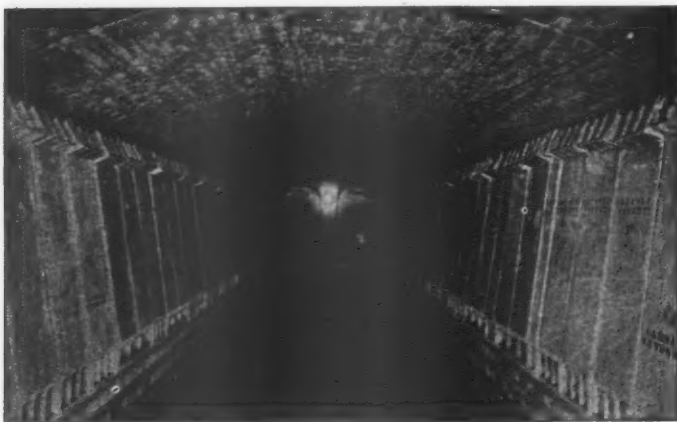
VIEW INSIDE HEATING ZONE OF KILN, LOOKING TOWARD THE ENTRANCE END, SHOWING COMBUSTION CHAMBER
